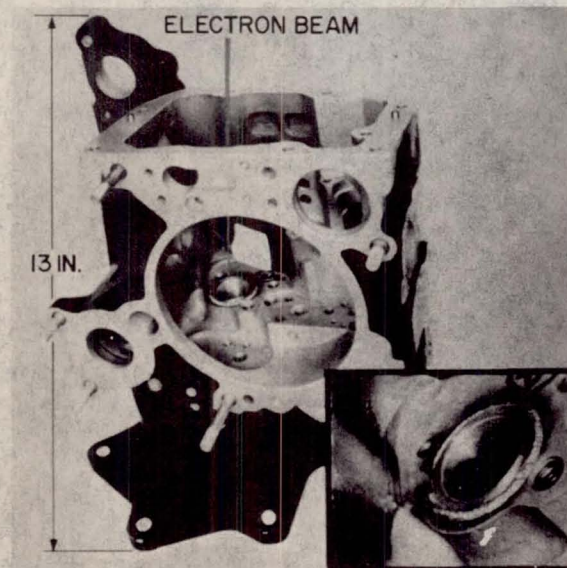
Repair of machining error in aluminum housing. Electron-beam welding. (Courtesy Hamilton Standard Div., United Aircraft Corp.)
